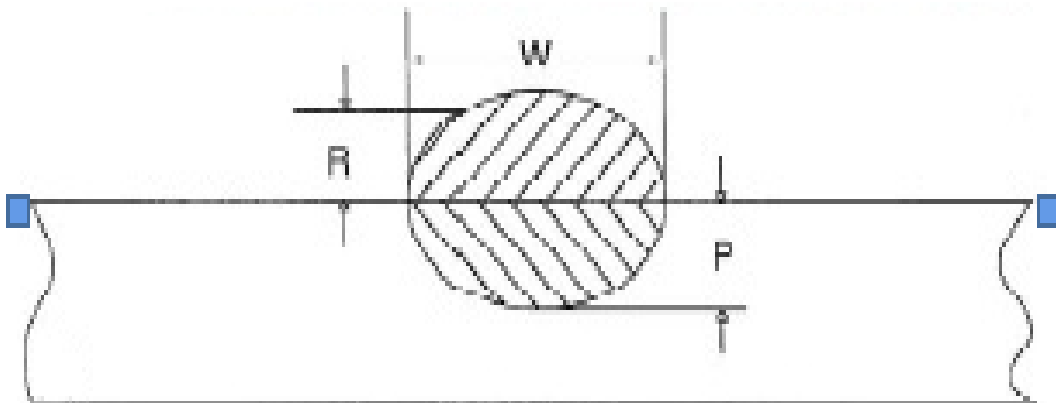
Cross Section View of Ideal Weld Bead
